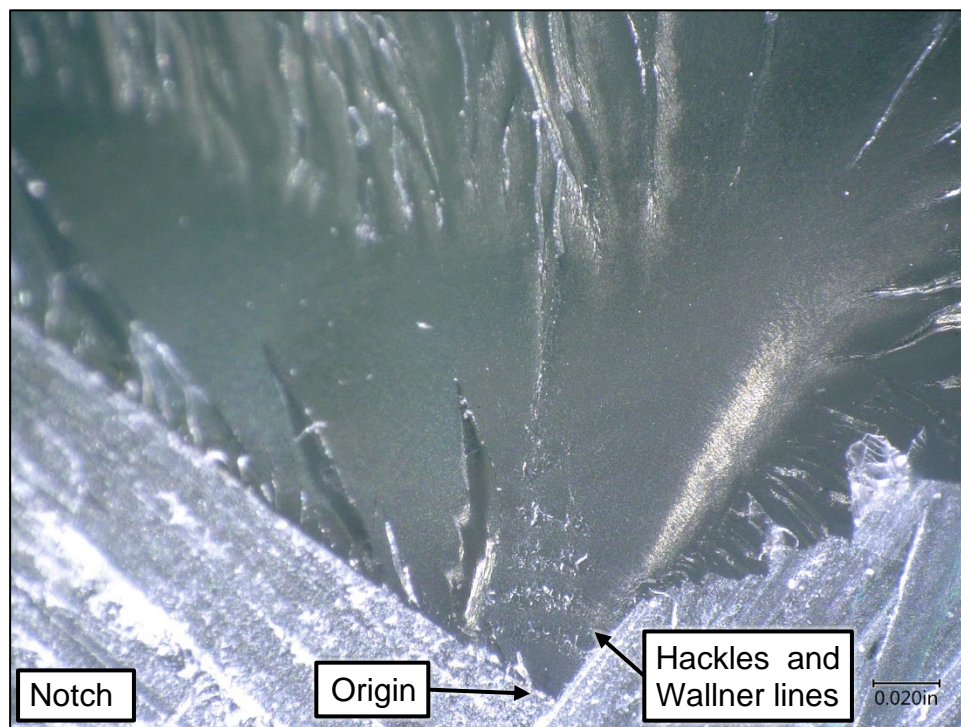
Optical image of a lab-created impact fracture that initiated from a chevron-shaped notch cut into a sample of the windshield.
